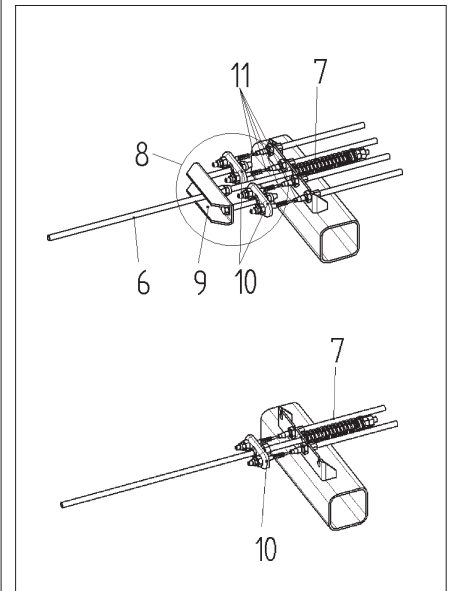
KNOTT transmission system for tandem and single-axle chassis.
